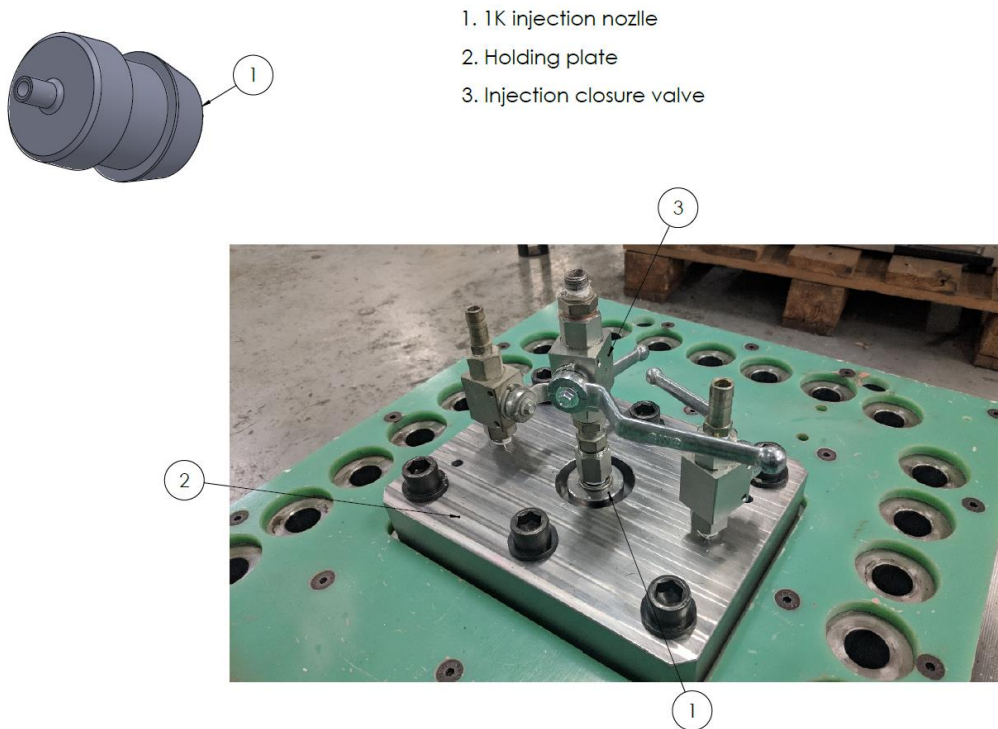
Detail of the mixhead connection into the mold. Mono-component injection configuration with inlet and outlet closure valves
